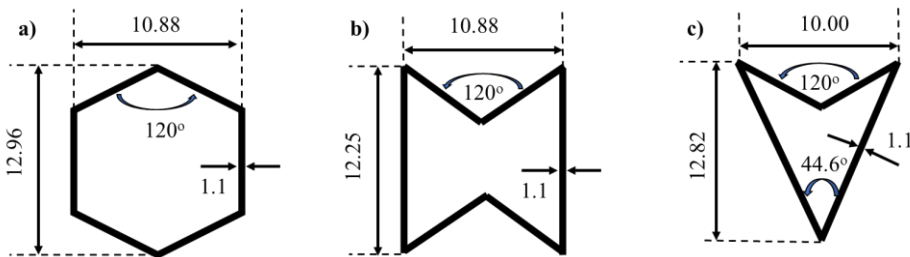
Dimensions of unit cell geometries: a) honeycomb, b) re-entrant, c) double arrowhead
